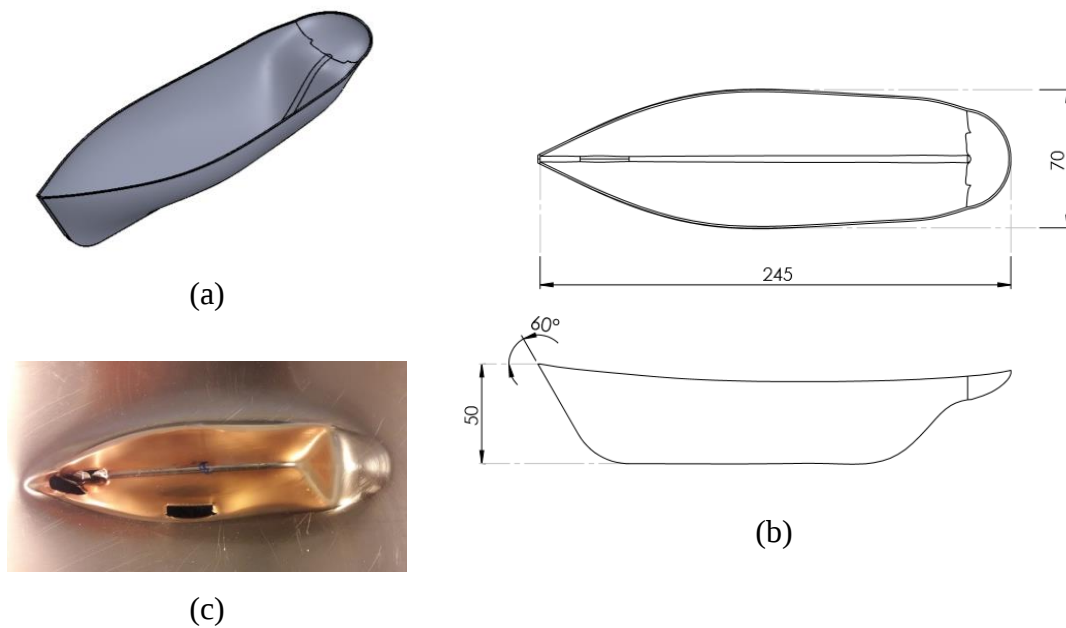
Prototype of ship hull, a) Isometric view, b) top and side view with dimensions in mm and c) resulting formed prototype of ship hull
